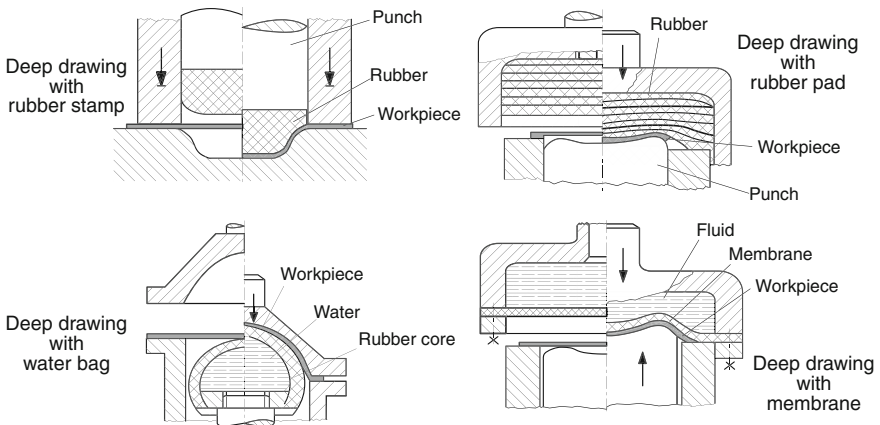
Deep drawing with elastic tools and active media (part 1)
